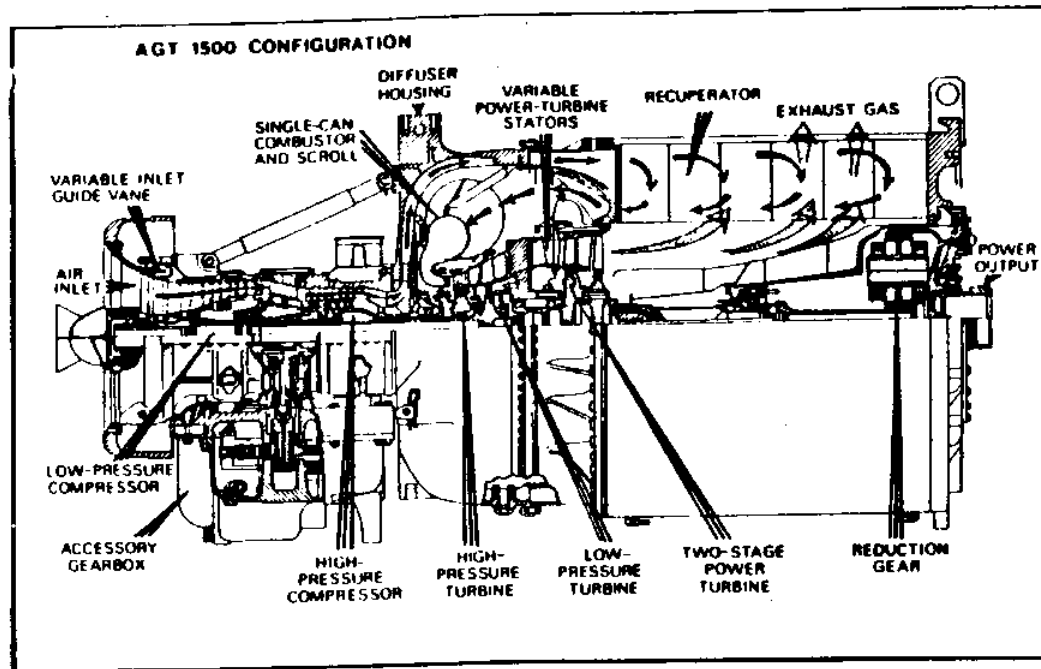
AGT-1500 TANK ENGINE: CROSS-SECTION THROUGH ENGINE.
